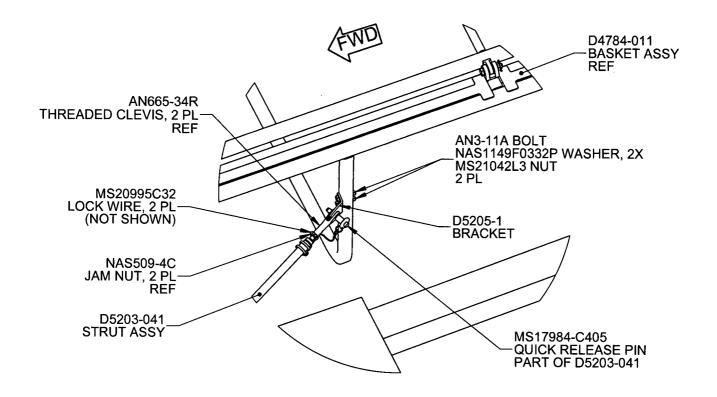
D5205-1 BRACKET INSTALLATION (RH INSTALLATION SHOWN, LH OPPOSITE)
